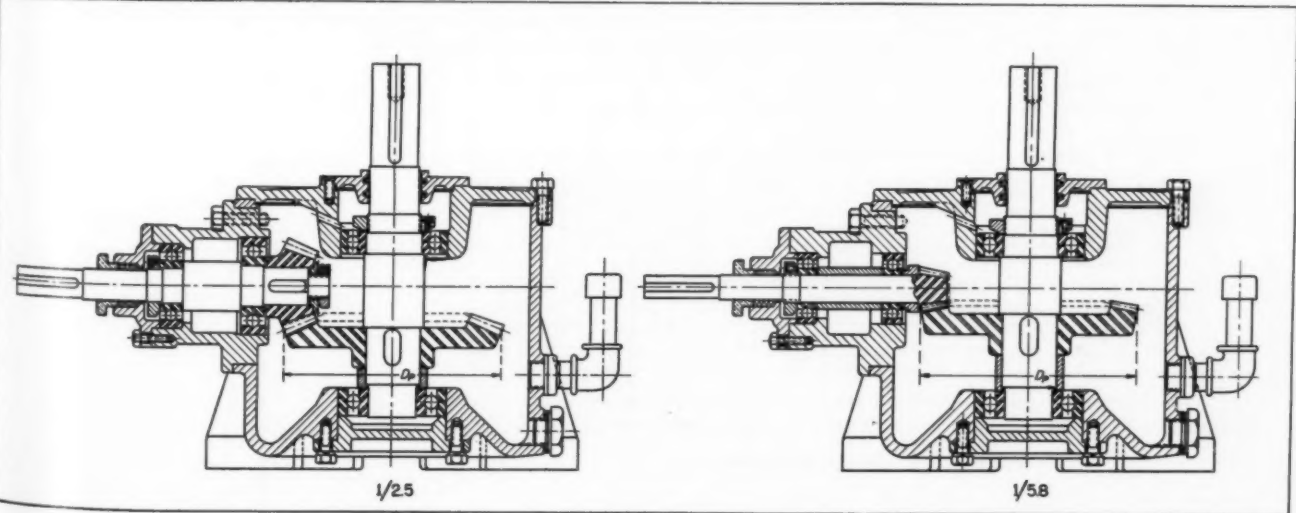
Typical bevel-gear reducer units for cooling-tower fan applications. Cross-section views illustrate how same standard housing can be utilized for different gear sets. Photo, courtesy P. Merlini and Hijos, S.R.L., Buenos Aires
